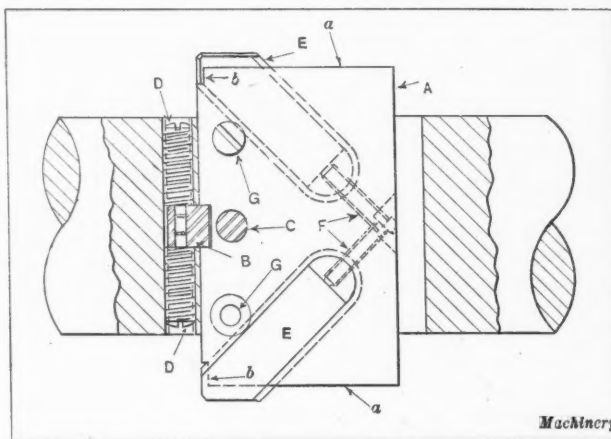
Sectional View showing One Method of assembling the Reamer Bodies in Bars
